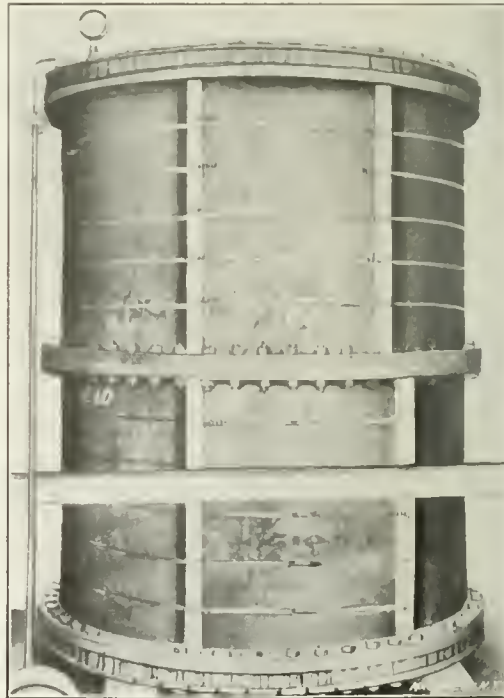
Complete Hydraulic Cylinder made in Two Parts and Tested at a Pressure of 1800 Pounds per Square Inch
